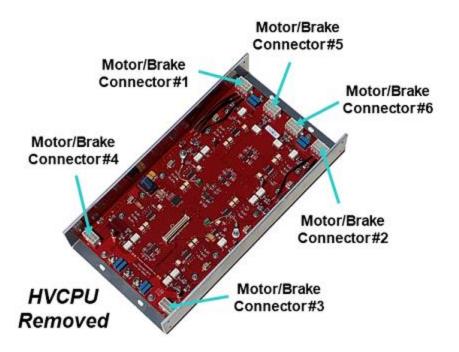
Motor Connectors Positions and Numbering for the Six-Axis G6600 Controller
